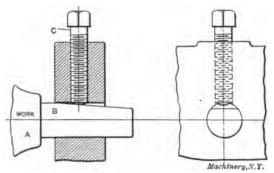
Adjustable Locating Point consisting of a Flatted Stud Held in Place by a Set-screw
